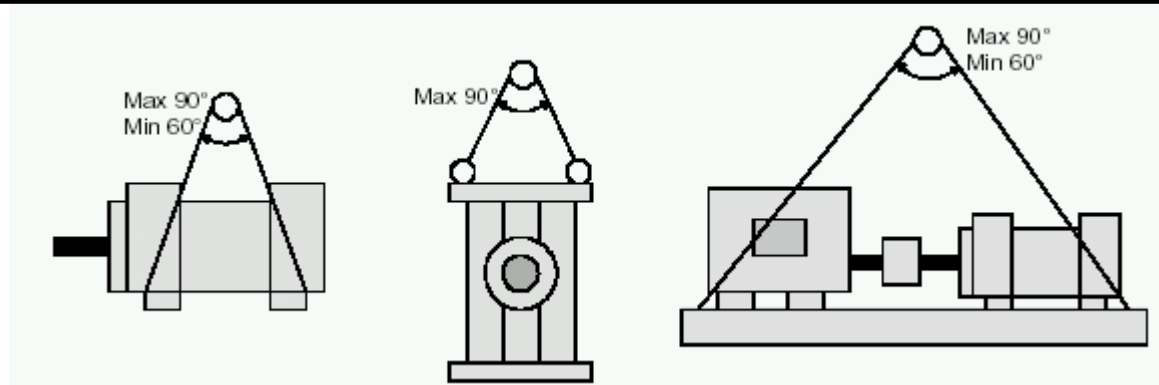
Lifting Pumps and Pump/Driver Assemblies
